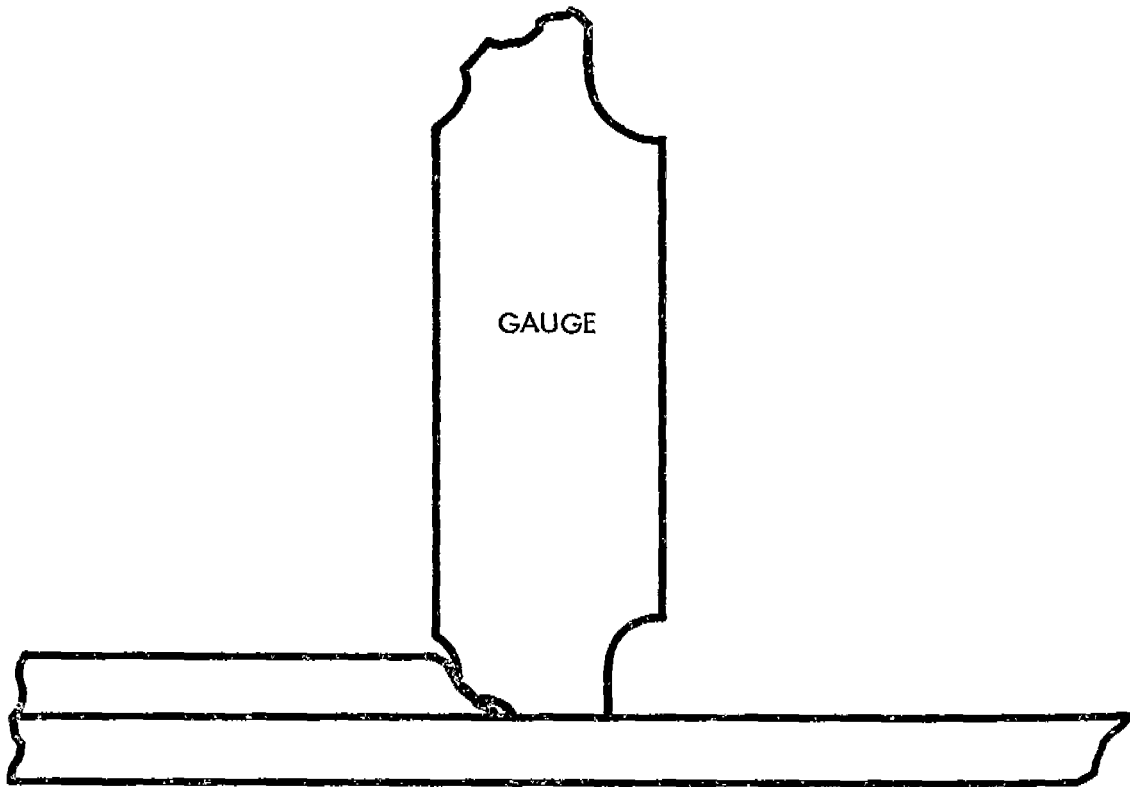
B CONCAVITY MEASUREMENT OF A LAP JOINT WELD
